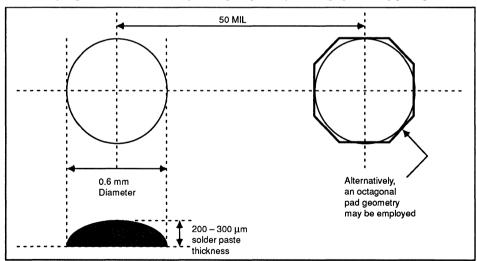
Solder Pad Design for Surface Mount Pin Grid Arrays
